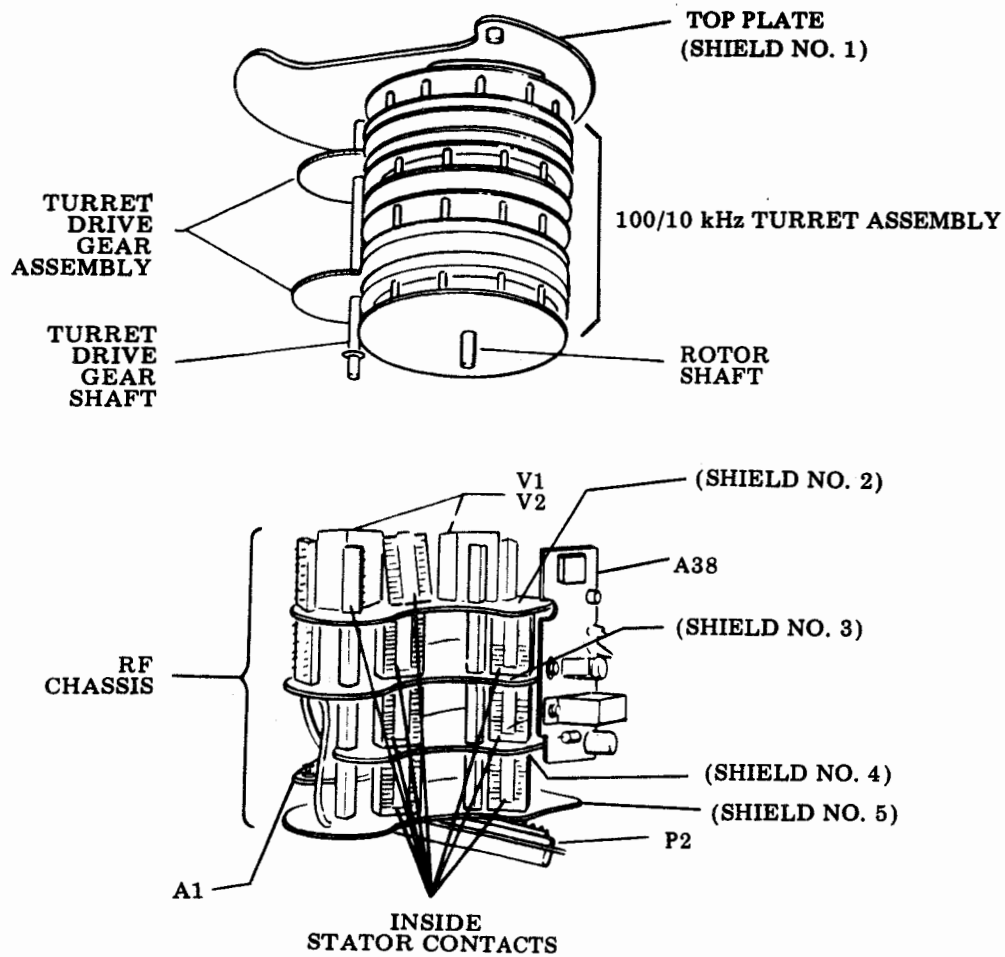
RF Amplifier Assembly A2A4, RF Chassis and Turret Assembly, Disassembly Parts Location
